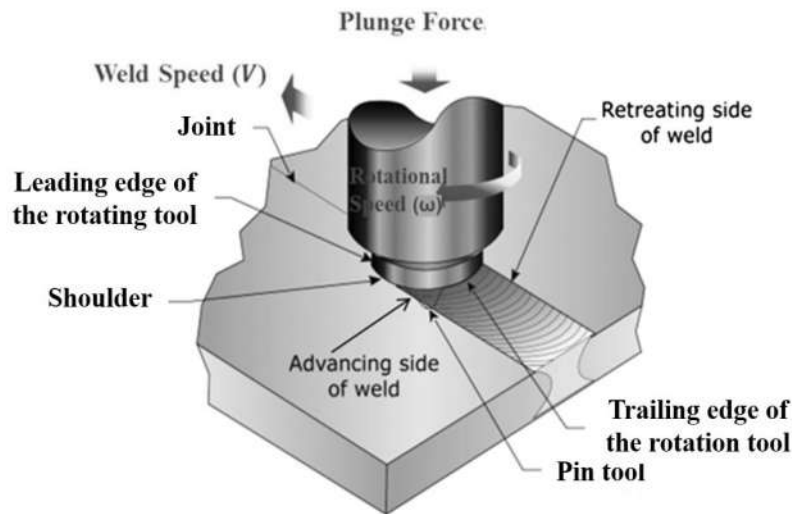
Schematic of friction stir welding (FSW) process.
